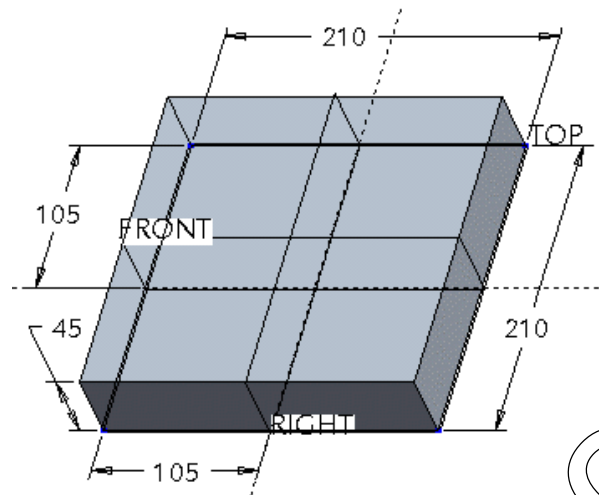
Extruded block to a depth of 45.0 (1.77 in.).
